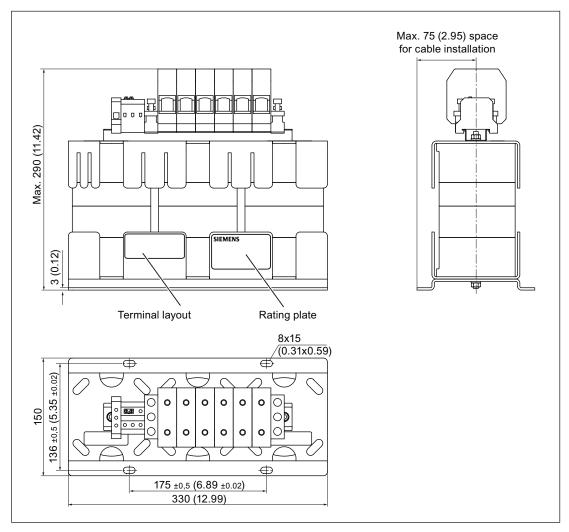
Dimension drawing of HFD line reactor 55 kW, all dimensions in mm and (inches)
